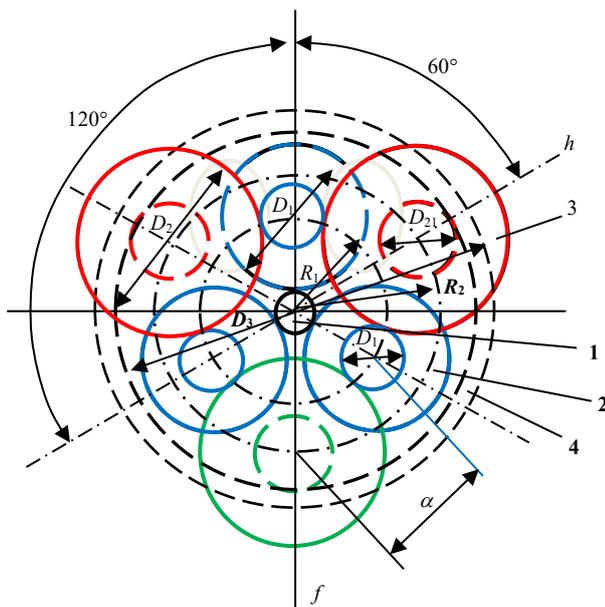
The layout of the gears, 1) gear part of the DC motor shaft; 2 and 3) gear wheels; 4) internal gear wheel
